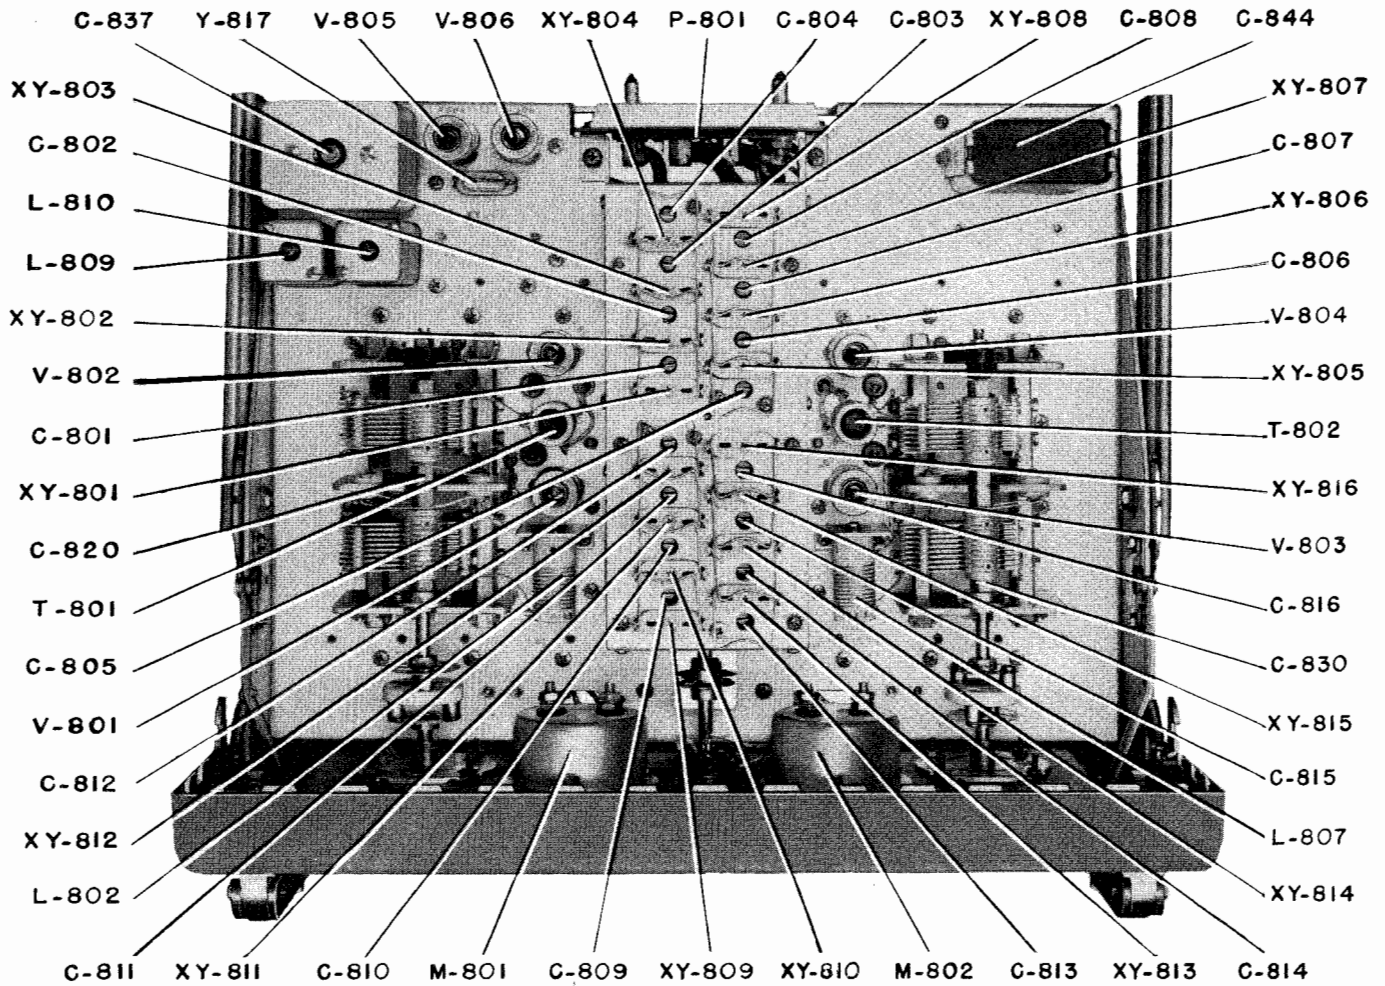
Component Locations Top of Chassis, Oscillator Assembly O-131/FRR-24
